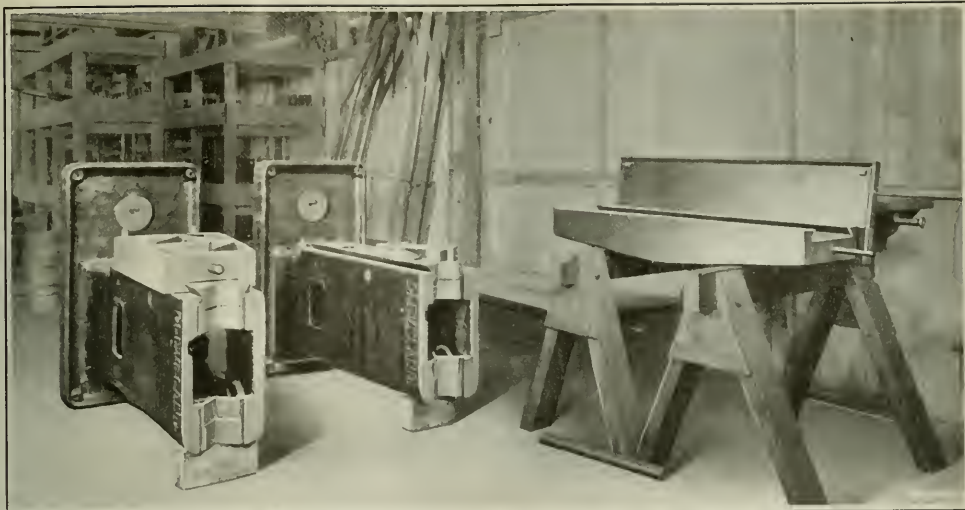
Milling Machine Columns blocked up in Readiness for Scraping
